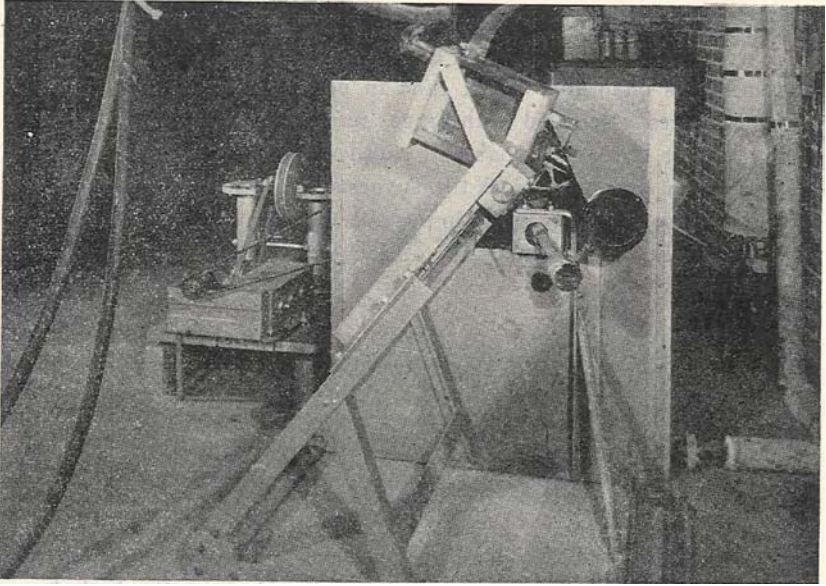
View of crucible in pouring position showing arrangement of steam gun and pressure gauge.
